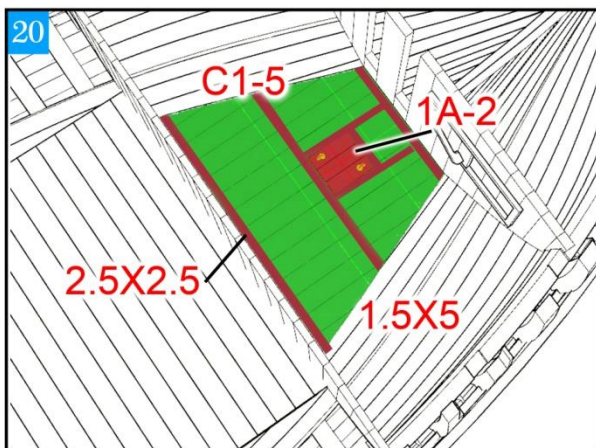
To construct the floor in this area of the ship, the template C1-5 template is used to check the shape. Adjust the shape of the template until it matches the shape of the floor and use 2.5x2.5 timber for the beams, and 1.5x5 wood strip for the floor.
